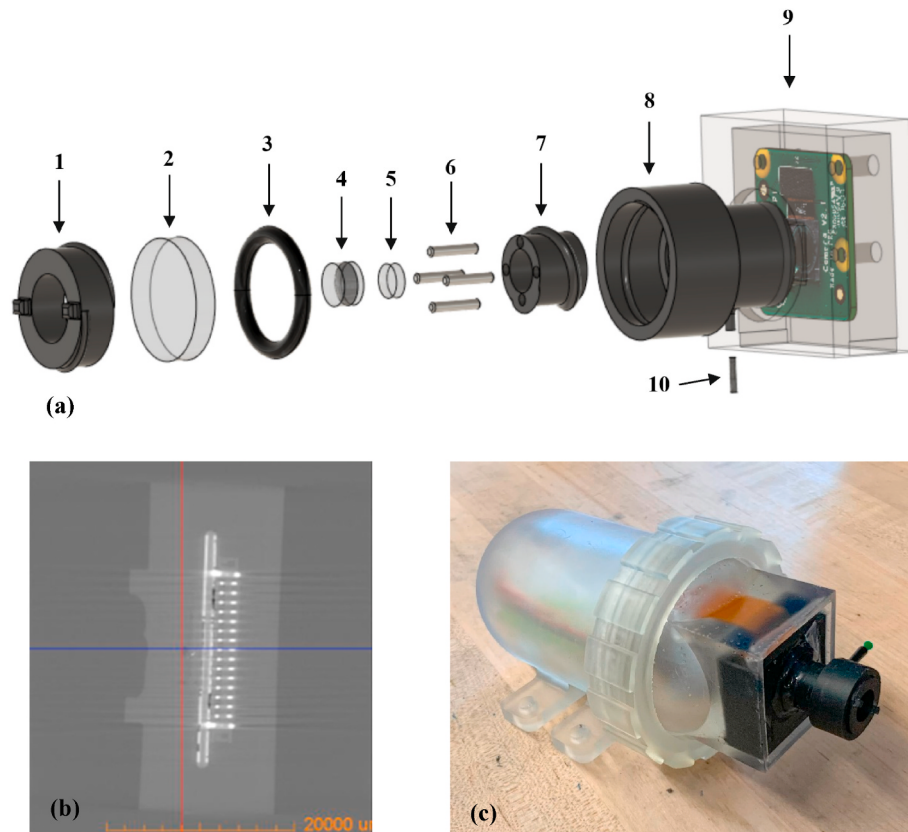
(a) Expanded view of PresTo (1) screw cap to hold the viewport in place (2) acrylic viewport (3) O-ring (4) achromatic lens (5) double convex lens (6) steel pins (7) lens holder (8) lens chamber (9) PCB/sensor case which is filled with clear epoxy (10) flexible tube for fluid compensation (b) X-Ray image of the epoxy potted case with the PCB and sensor (c) 3D printed assembly integrated with a 1-atm dry housing holding a Raspberry Pi Zero 2 W and a battery.
